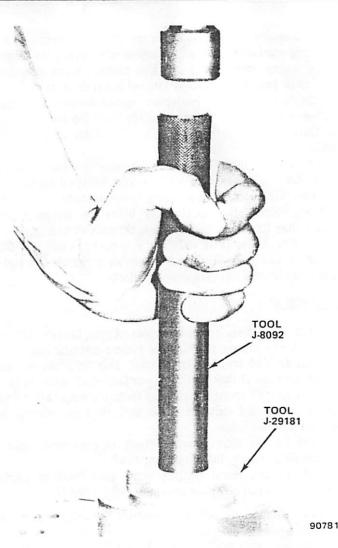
D-84 Front Output Shaft Front Bearing Race Installation
